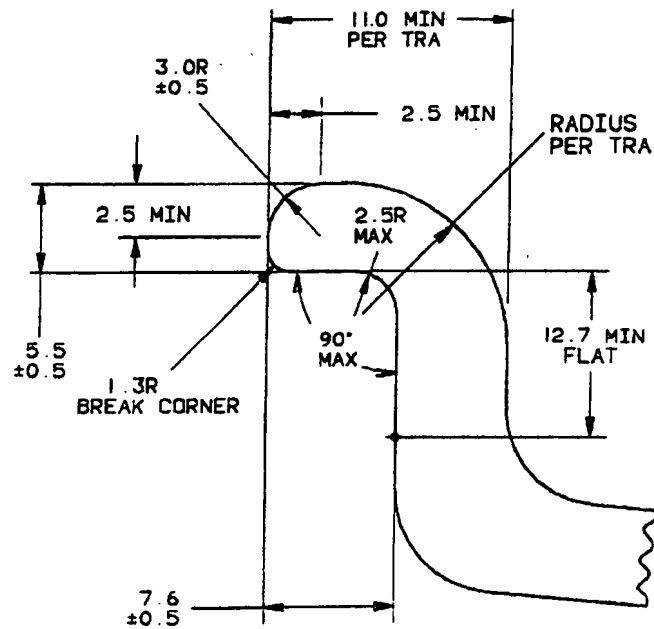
RECOMMENDED FLANGE DESIGN PRACTICE MACHINED ALUMINUM WHEELS
